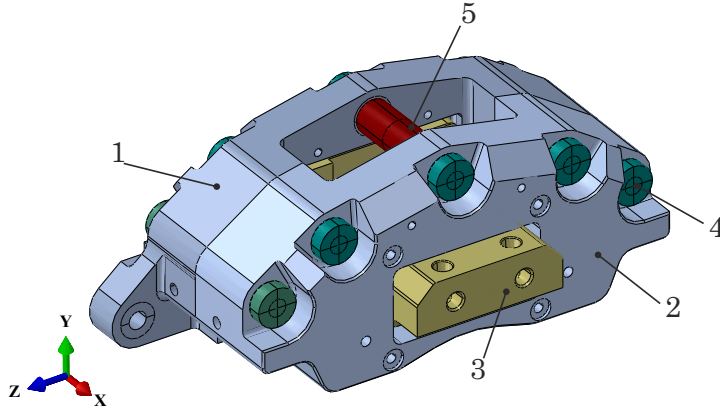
FE model of reduced caliper assembly: 1) inboard caliper, 2) outboard caliper, 3) piston module, 4) bolt, 5) spacer.
